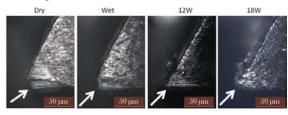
Flank wear for dry, wet, 12 W, 18 W cases; machining condition 1.
